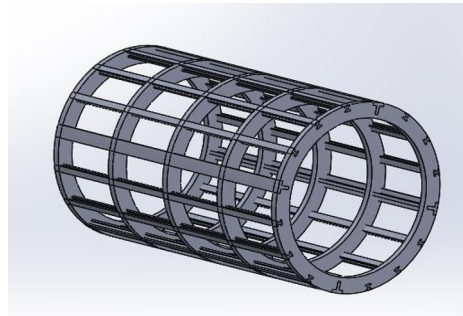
Structural arrangement 2 with T-spars, T-shaped frames and I-shaped stringers; cover not shown
